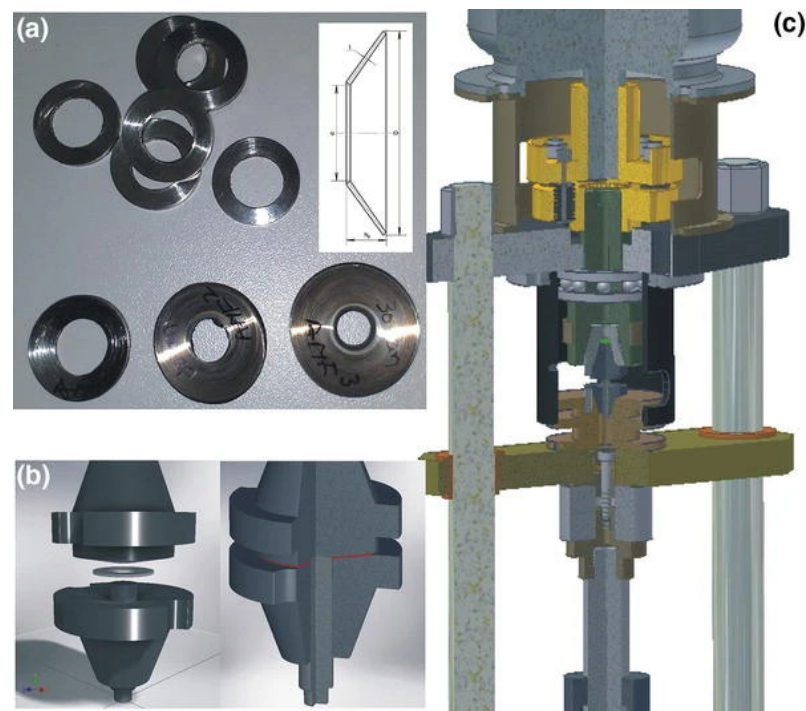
HSHPT technology: (a) disk-shaped samples and their geometry, and final shapes of Fe–Mn–Si–Cr SMA coned disk spring-shape modules, (b) HSHPT upper and lower anvils with open and closed conditions, and (c) HSHPT machine, adapted with permission from [96], 2023, Springer Nature.
